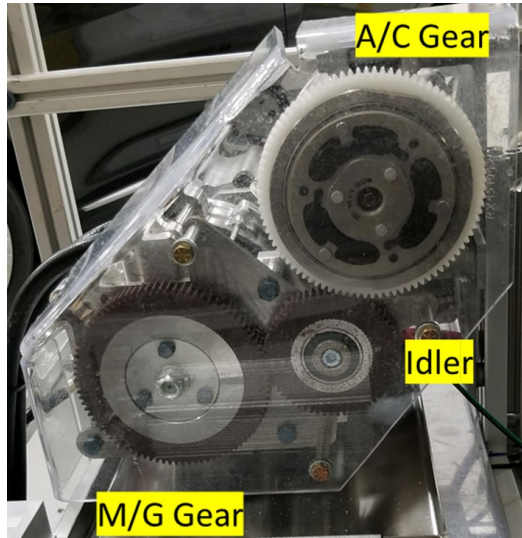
Front View of P3 Motor/AC Compressor Transfer Gear
